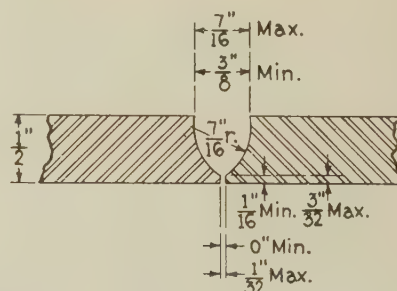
DIMENSIONS OF BEVEL FOR WELDING 1/2-IN. PLATES
